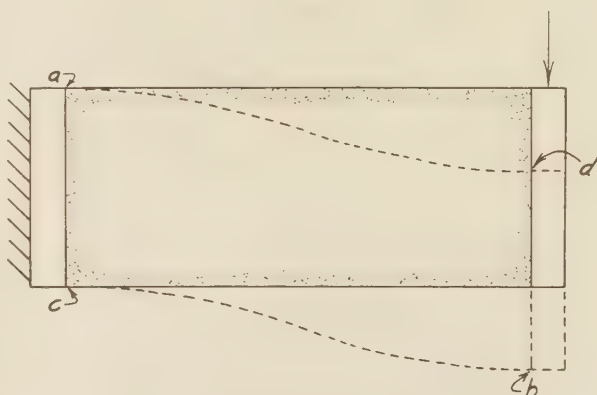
THICK SHEAR SPRING, END-GUIDED
